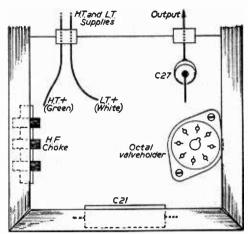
Underside of the oscillator section showing the components not removed but with int.
